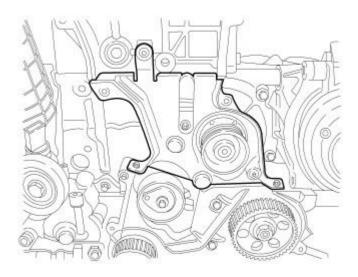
Idler Pulley & Bolt Courtesy of CHRYSLER LLC
